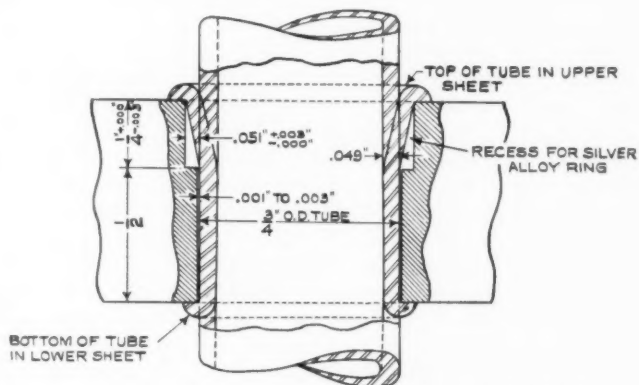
COMPOSITE CROSS SECTION SHOWING NEW METHOD OF BRAZING AND BEADING OF COPPER TUBES IN STEEL HEADS
